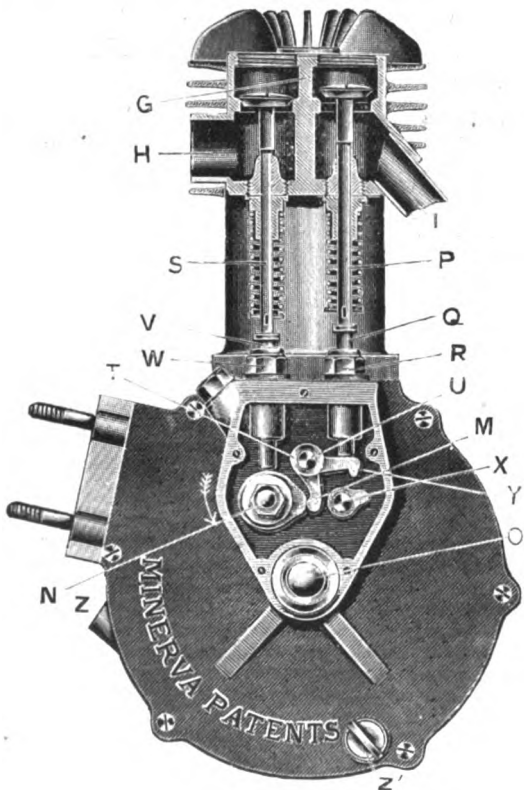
SECTIONAL VIEW OF NEW MINERVA MOTOR, SHEWING VALVE-OPERATING MECHANISM.
